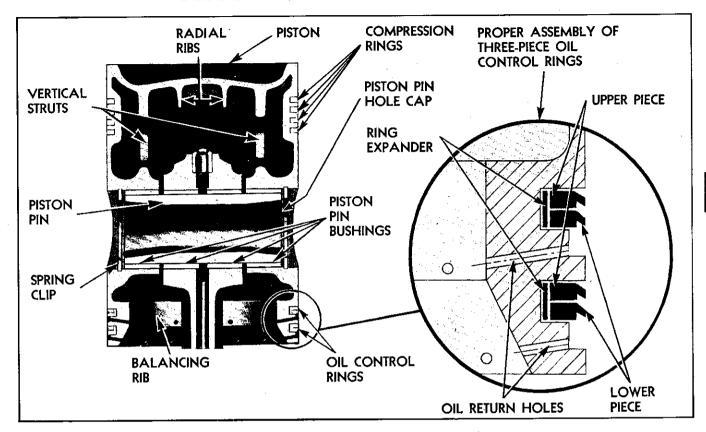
Piston, Piston Pin Mounting, and Piston Ring Locations.
